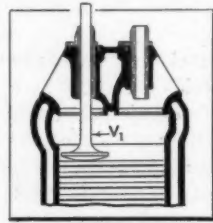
Section of a cylinder with valve in the head showing the valve dropped down on the piston
